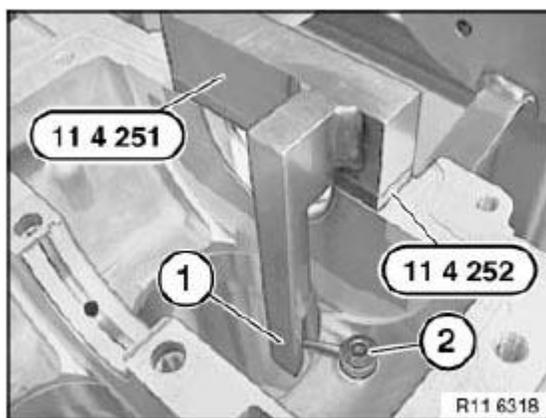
Attaching Special Tool To Screw Connection On Main Bearing
